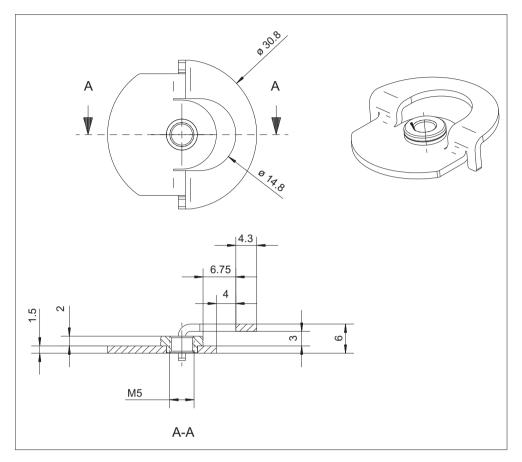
Dimension drawing of the HT 2 mounting bracket
